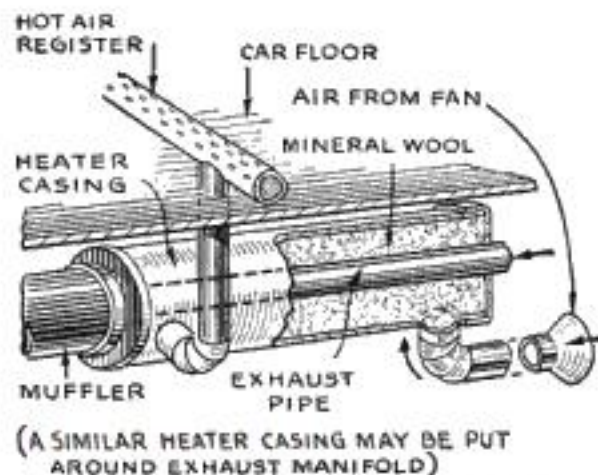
Mineral wool stuffed into the jacket over exhaust manifold will stop a cold draft
